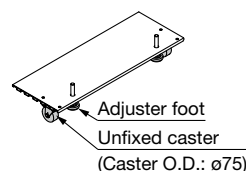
Caster adjuster-foot bracket (2 pcs.)
